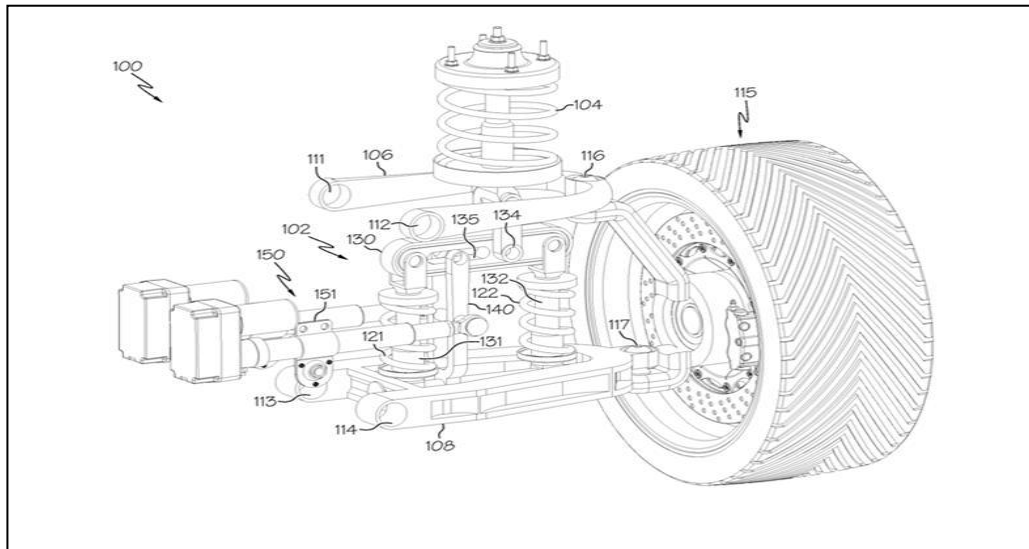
Spring Suspension with Pivot-Lever Mechanism [16]
